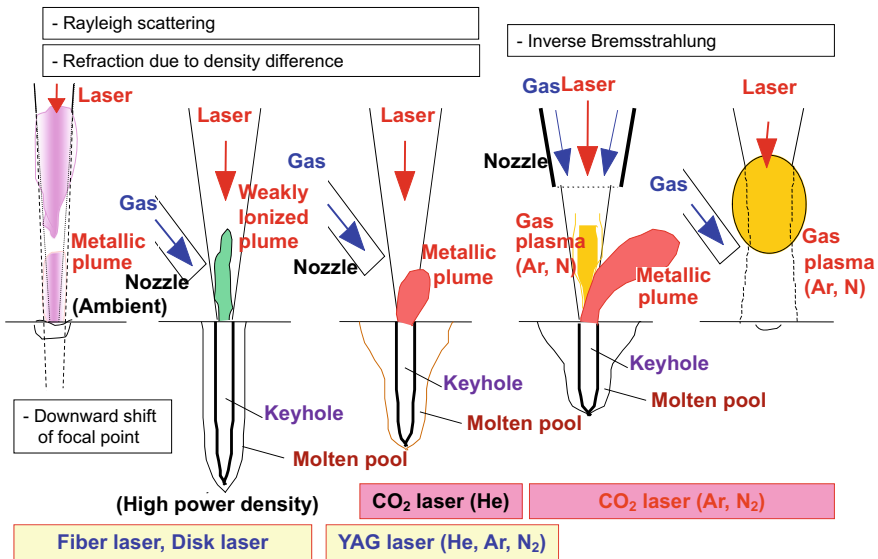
Schematic illustration of plume and plasma formation during laser welding and their respective physical effects on weld penetration in no gas or He, N₂, and Ar shielding gas
